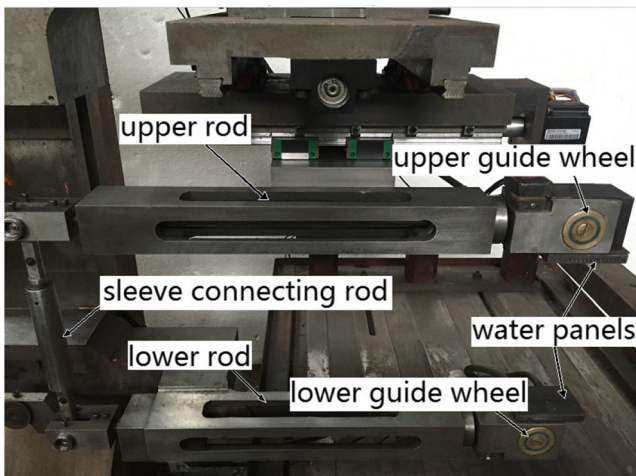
Photograph of traditional four-bar linkage swinging wire frame of large taper WEDM
